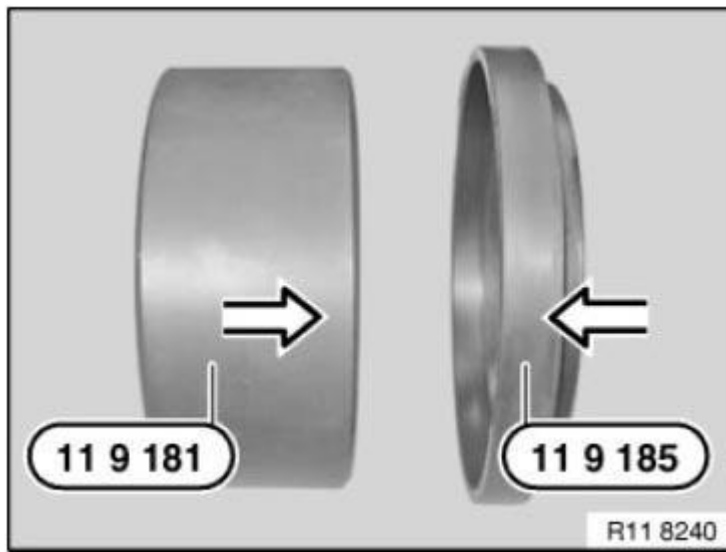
Connecting Special Tool 11 9 185 To Special Tool 11 9 181
